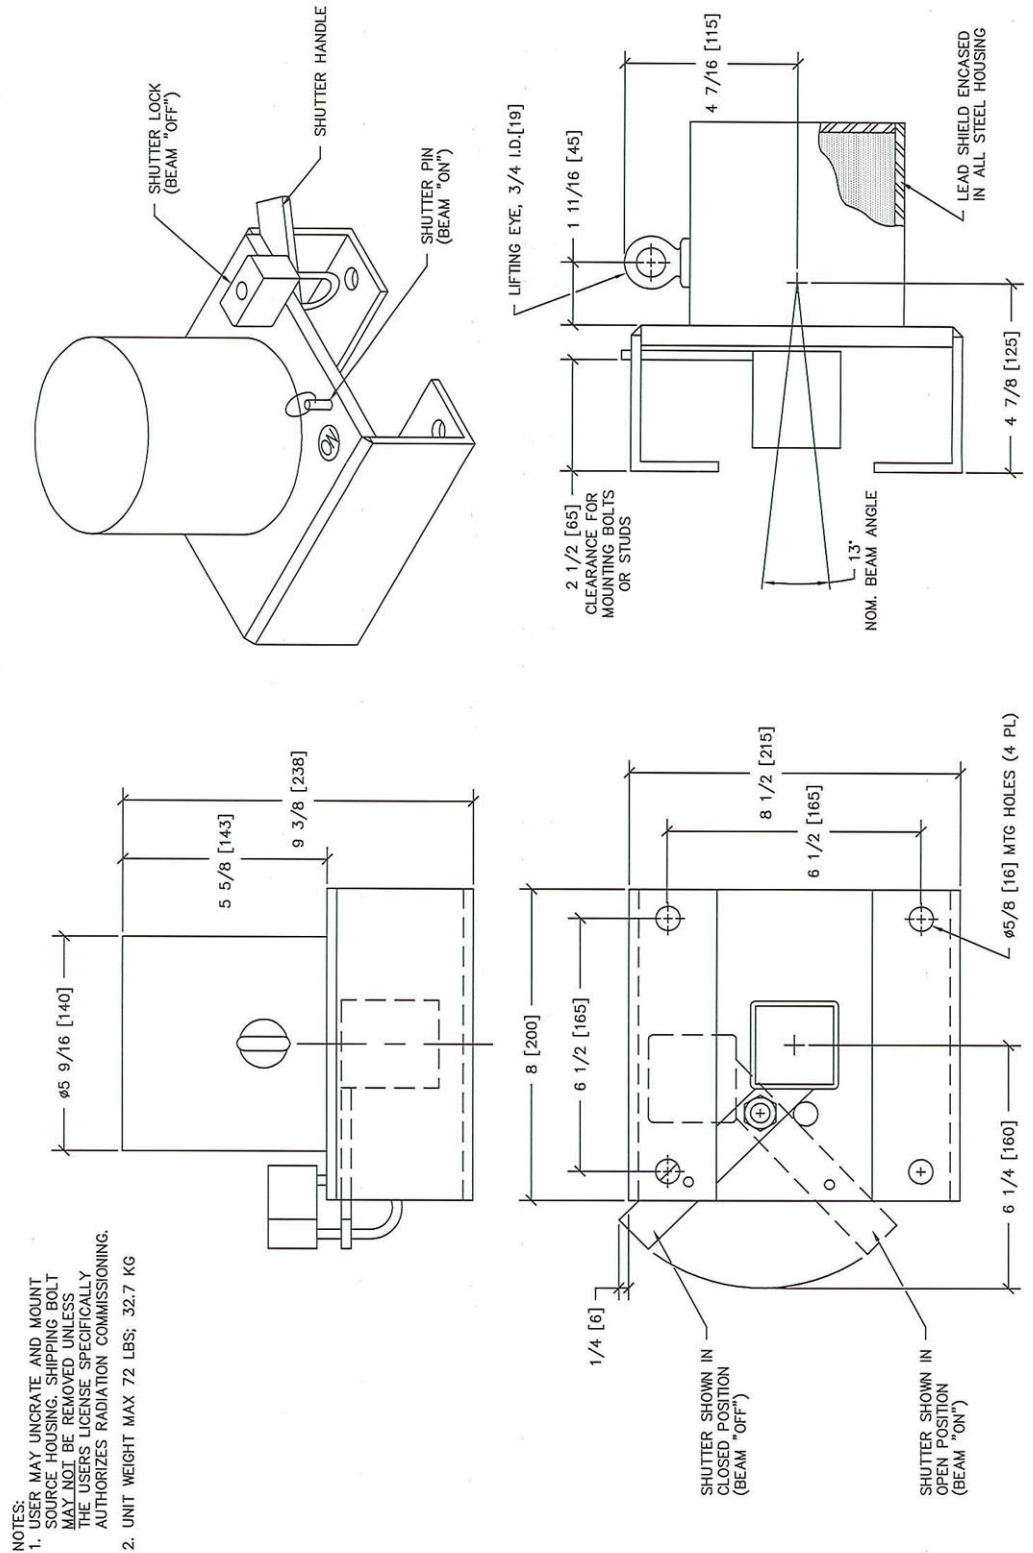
865463: Mounting dimensions, 5202 source housing, 500 mCi or less (sheet 1 of 1)
